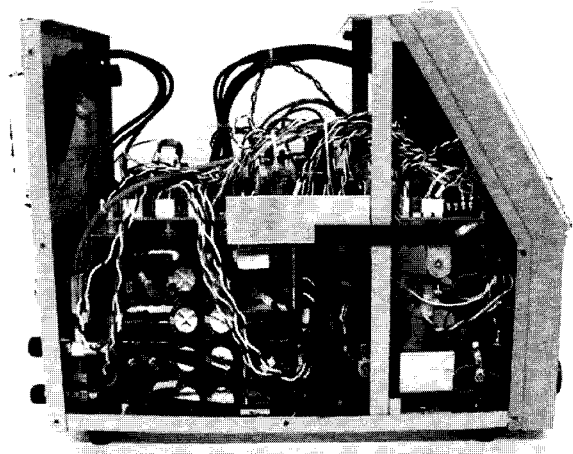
Overall Appearance of TIG arc welding power supply
